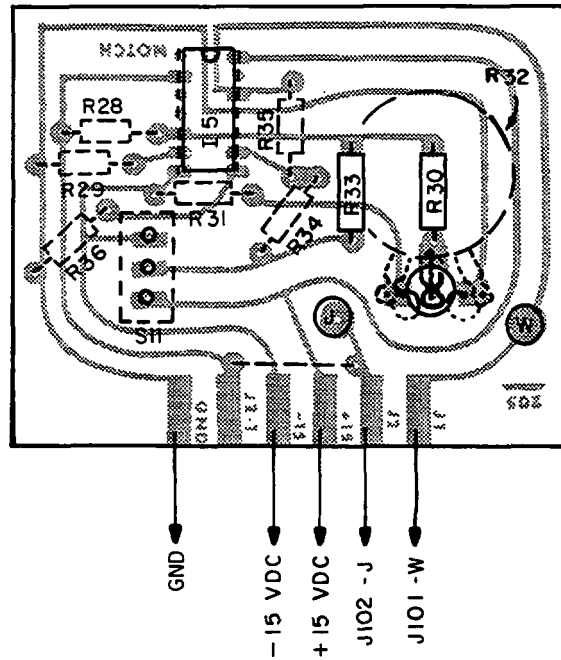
P.C. BOARD ASSEMBLY, BOARD 205, DRAWING
